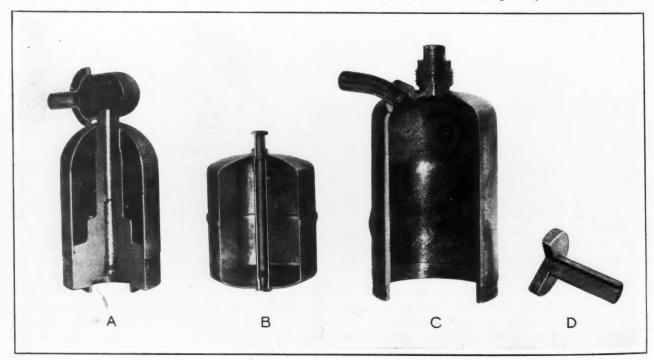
Small Parts Produced by Copper-brazing Machined Steel Pieces, Steel Castings, and Drawn Steel Sections
